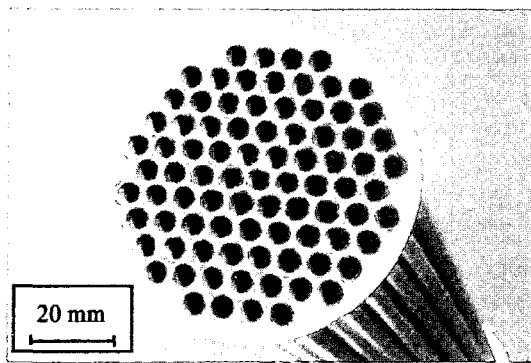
Remote welding of tube to tube plate He at exchanger<sup>12)</sup>
